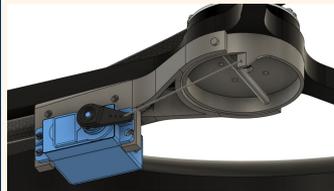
View of the entire assembly of the front motor mount, with emphasis on the linkage and pivot point.
